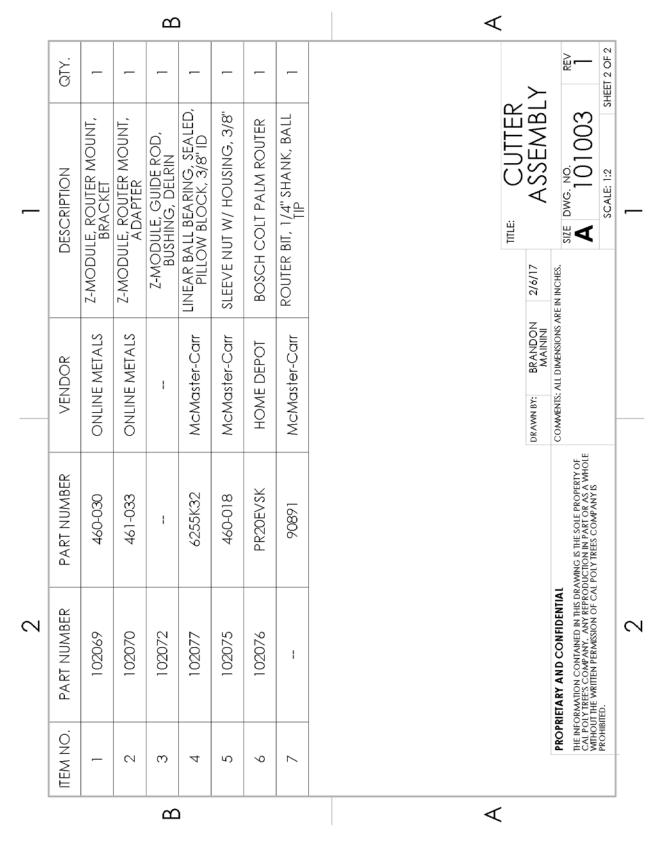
Cutter Assembly Detail Drawing (Page 2 of 2)
